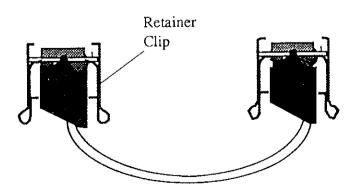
25 Pin Interconnect Cable (Relay or Terminal Board)
